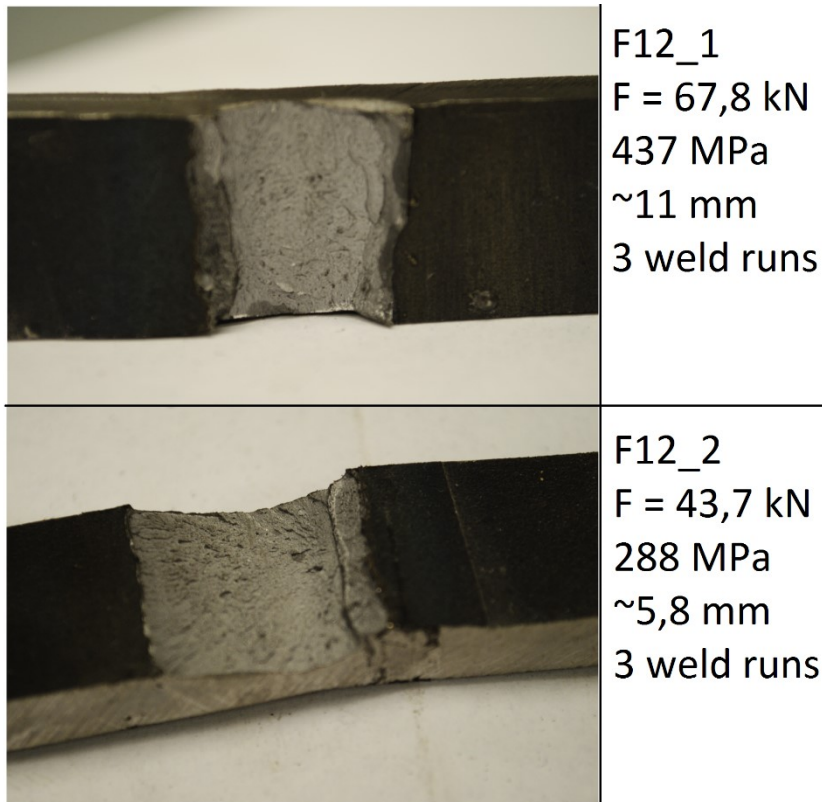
Fillet weld failures of *Giraldo (2018) - 2
